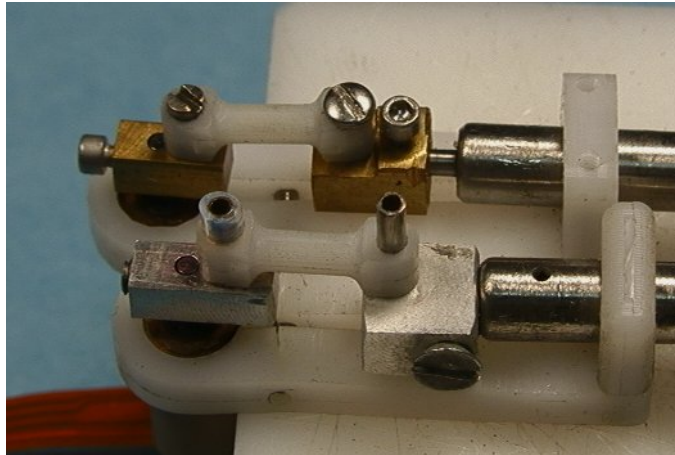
Bottom: Press Fit Axles. Top: Screw Supported Axles
